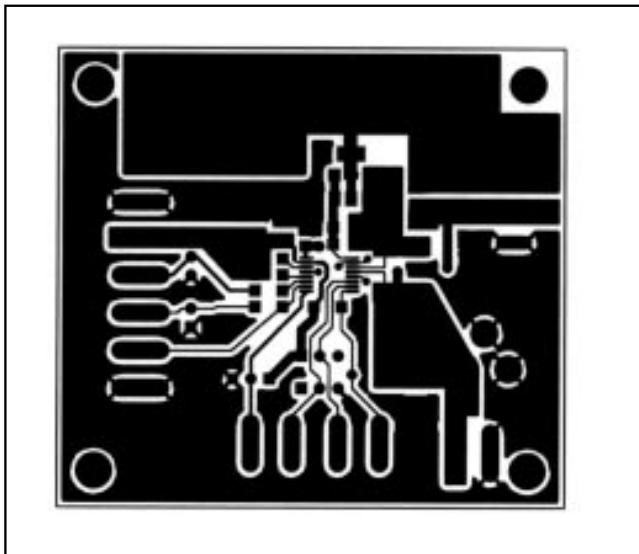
MAX846A EV Kit PC Board Layout—Component Side
